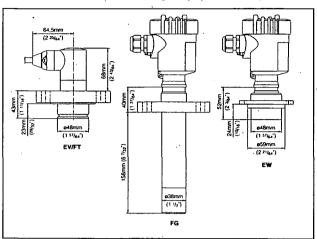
VEGABAR 64 extension fitting for paper industry: EV/FT = absolutely flush for pulper (EV 2-times flattened), FG = extension for ball valve fitting, EW = flange for manometer lug
